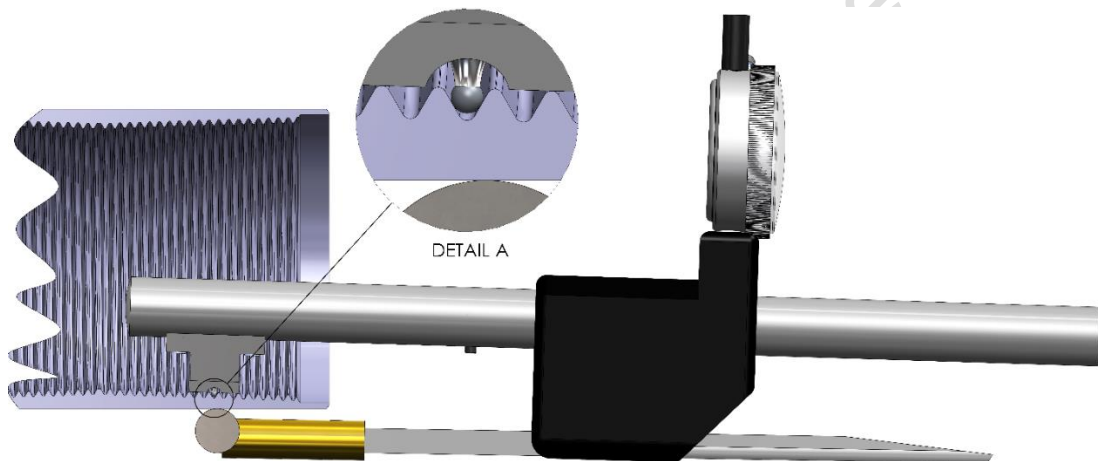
Internal Addendum Gauge on Coupling Threads (Round Thread Addendum Gauge)
